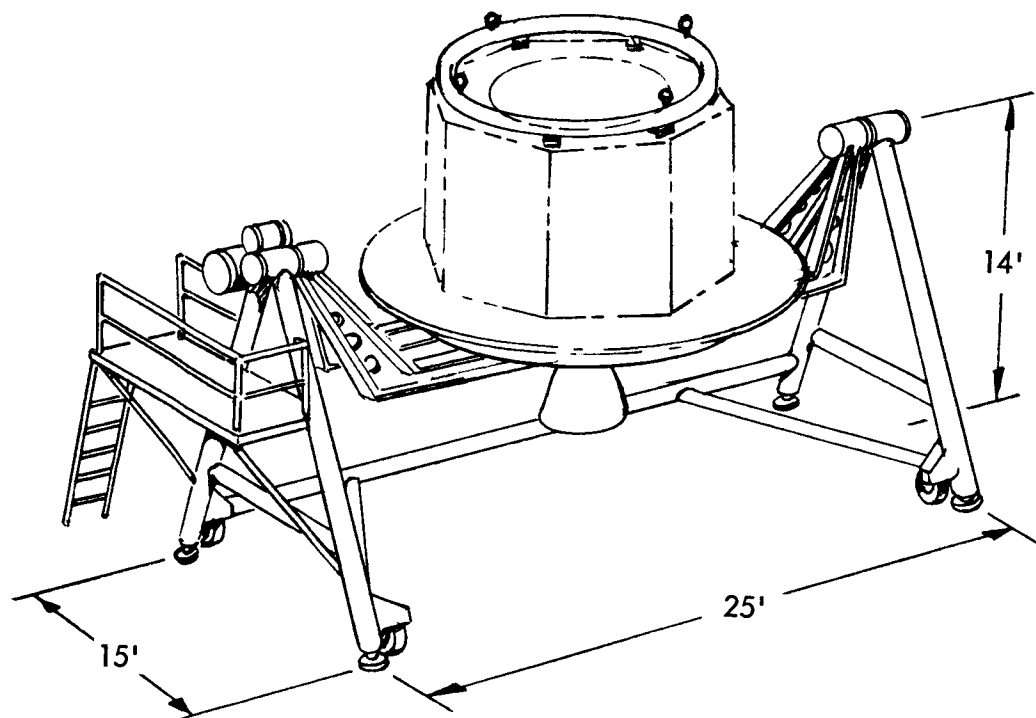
Spacecraft Transfer Fixture, MOSE 13
